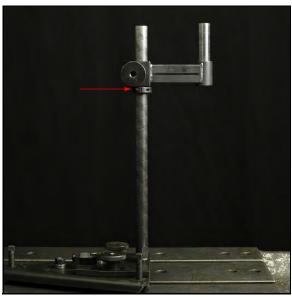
RADIAL MOUNT ON THE MOUNTING ROD
